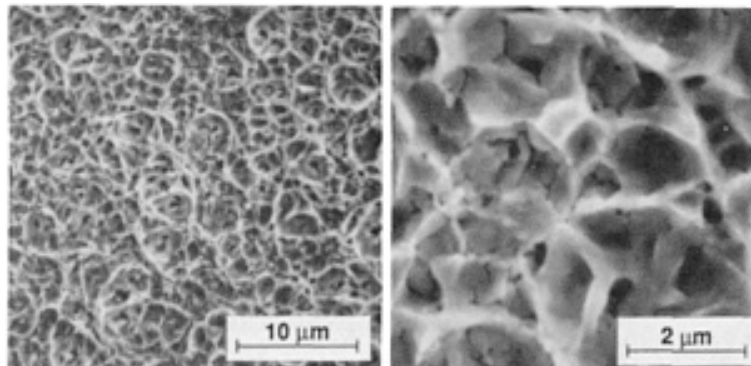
SOLID-STATE-WELDED SILVER INTERLAYER FRACTURE SURFACE BETWEEN LAPPED MARAGING STEEL BASE METALS
